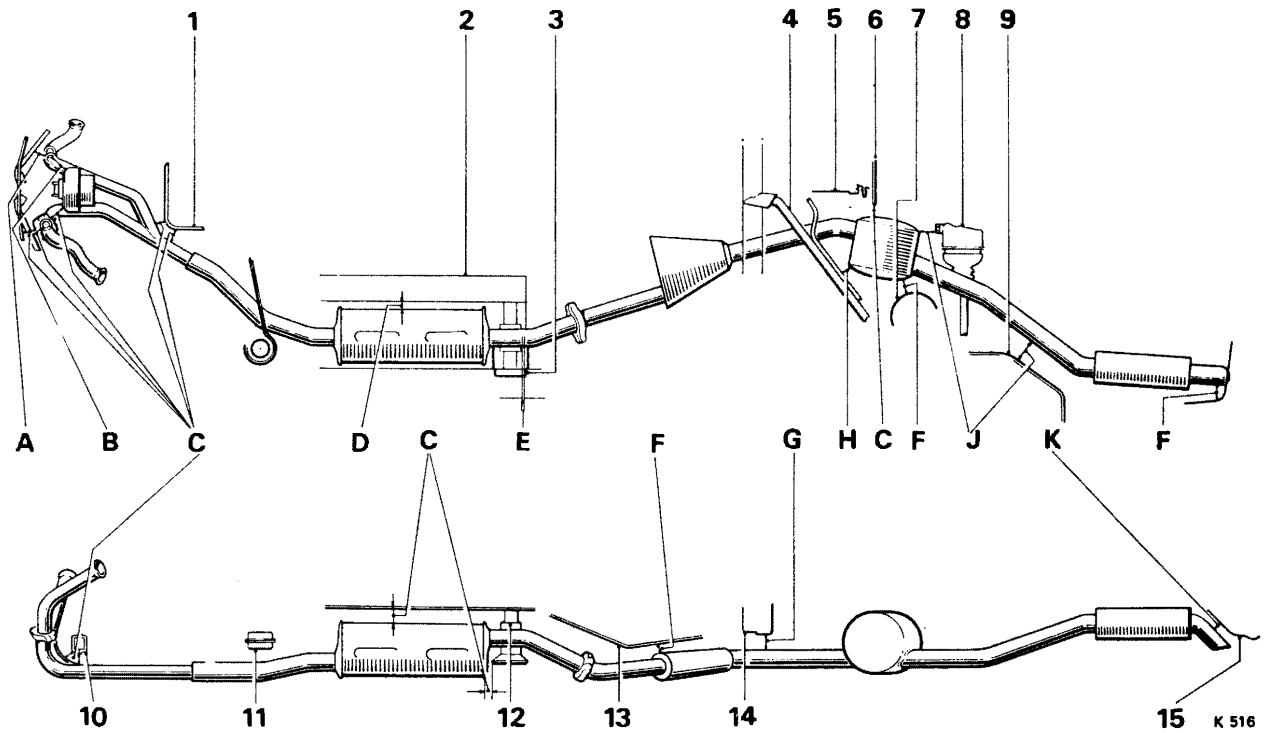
EXHAUST SYSTEM ALIGNMENT
